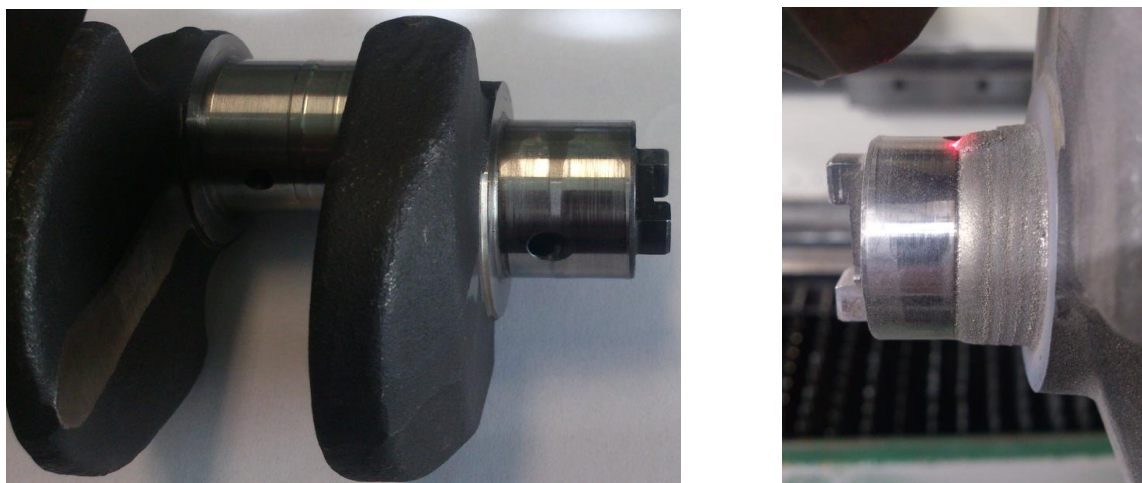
Surface of a worn crankshaft (left) and laser cladding process of a worn crankpin (right)
